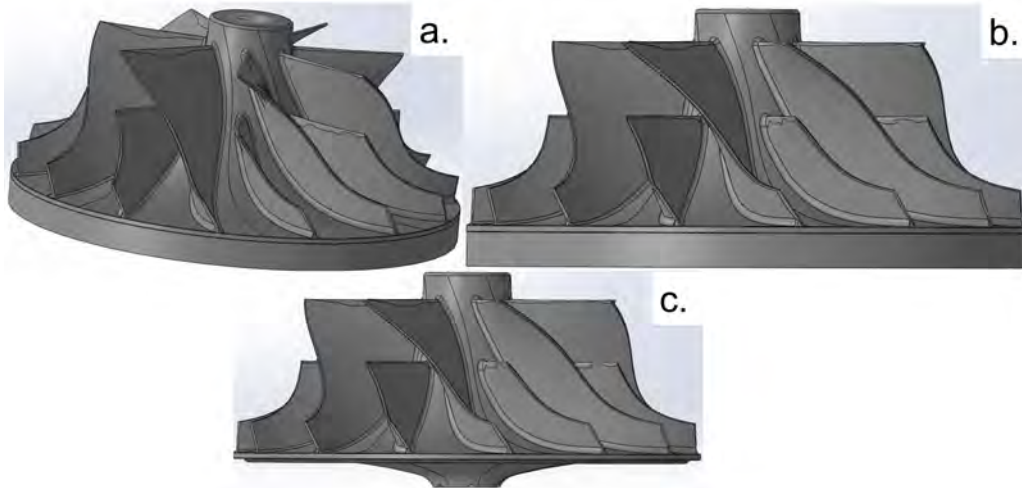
Printed Specimens a) Prior Back Face Surface Finish b) Prior Back Face Surface Finish (2) c) After Back Face Surface Finish
